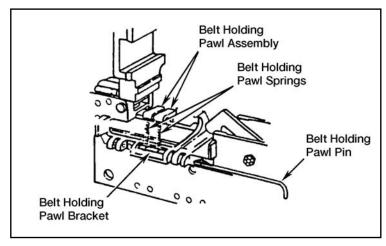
Installation of the belt holding pawl assembly
